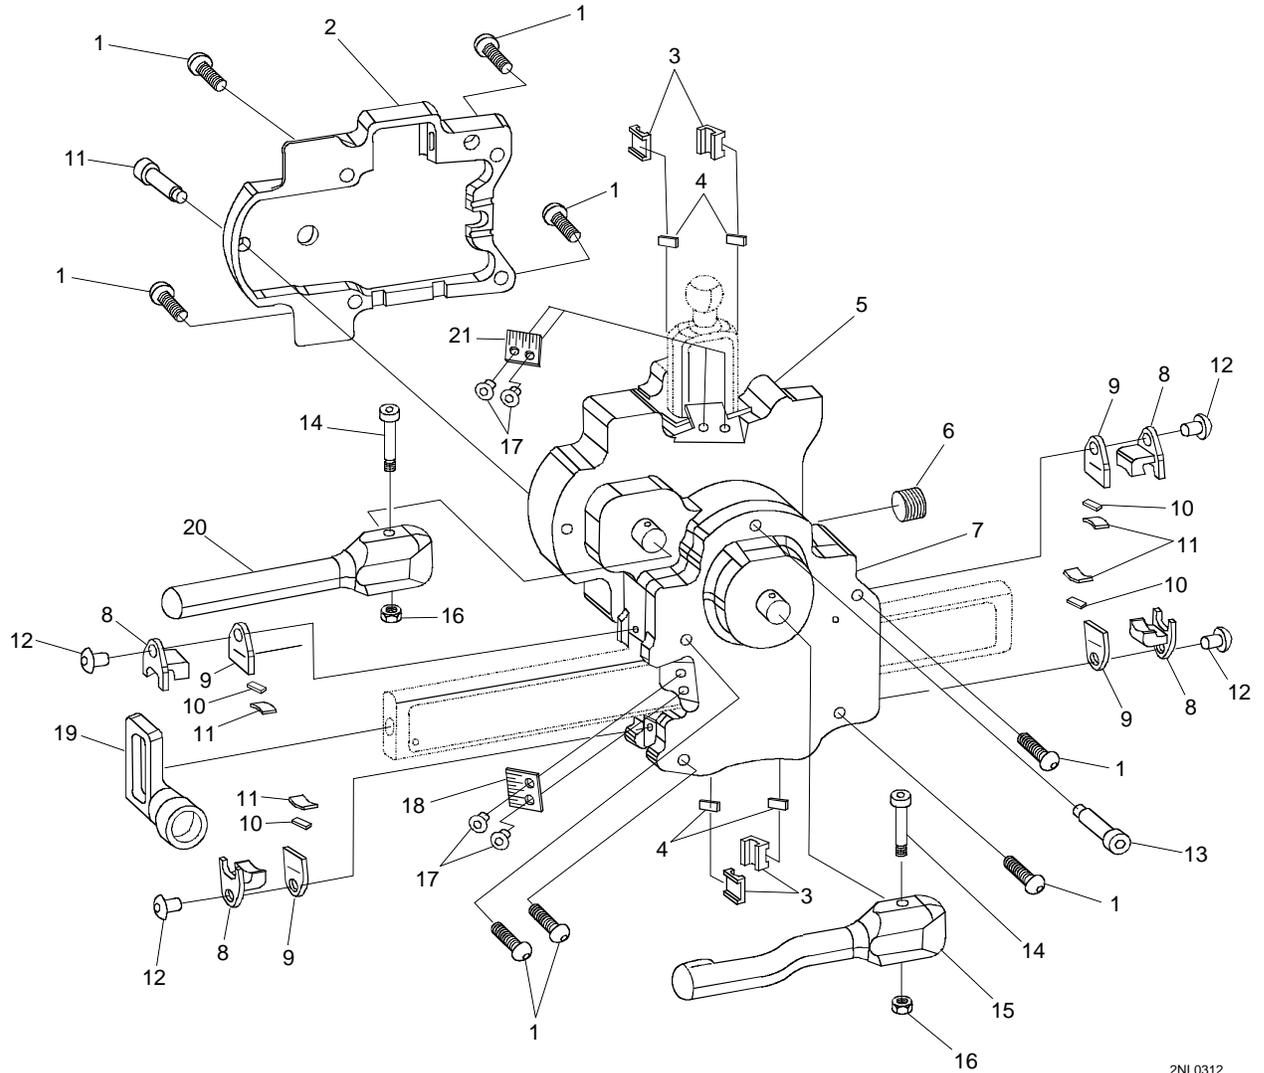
Leg Assembly, Right Rear, P/N 13001694 and
